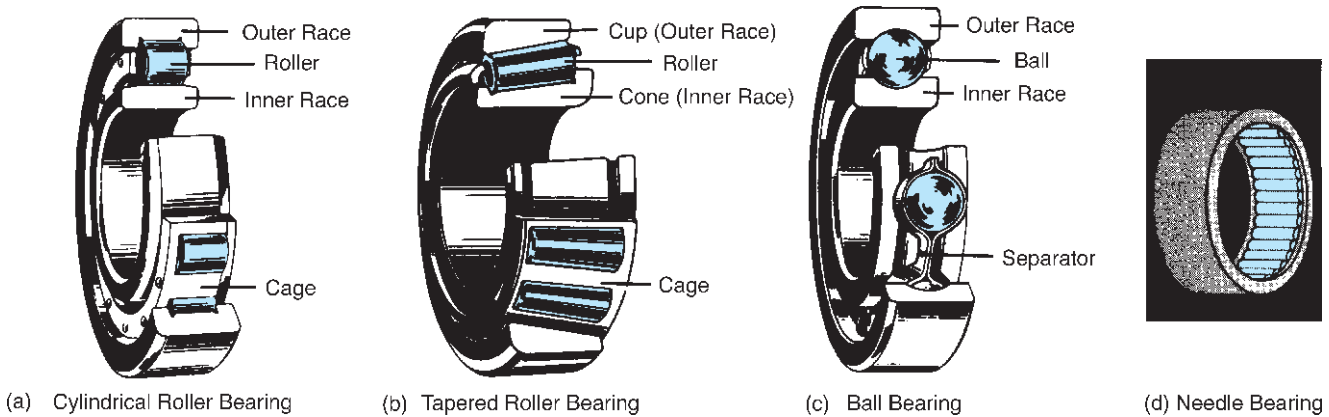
The types of frictionless bearings are cylindrical or straight roller bearings (a), tapered roller bearings (b), ball bearings (c), and needle bearings (d). (Courtesy of CR Services)
